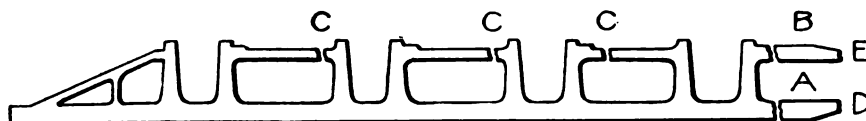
FRAME OF ENGINE 973, SHOWING FRACTURES.
